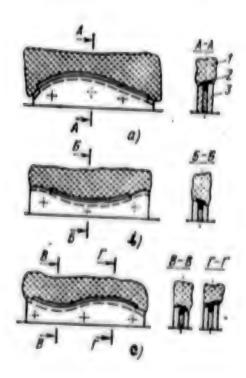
Diagrams of the stamping of parts from pressed structural shapes: a - with compression of the wall of the structural shape; b - with stretching of the wall of the structural shape; o - alternating our vature; 1 - elastic agent; 2 - structural shape; 3 - mandrel.
